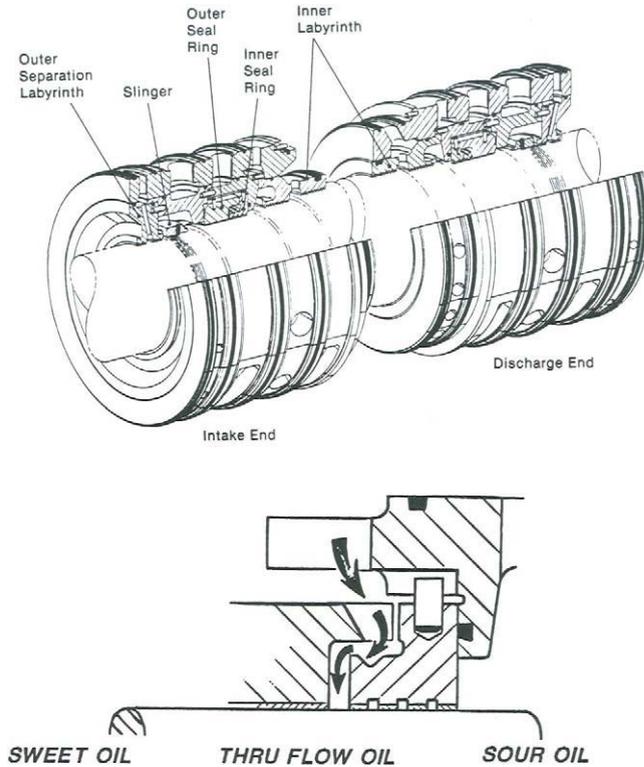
Bushing seal – top: oil film seal; bottom: seal oil flow (Courtesy of Dresser-Rand)
